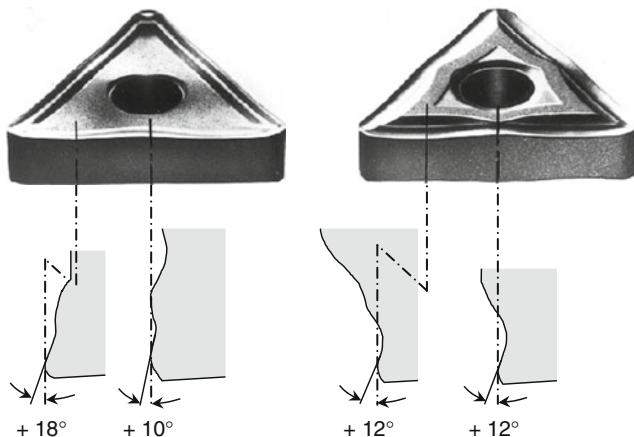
Inserts with chip former (Source: Sandvik)
